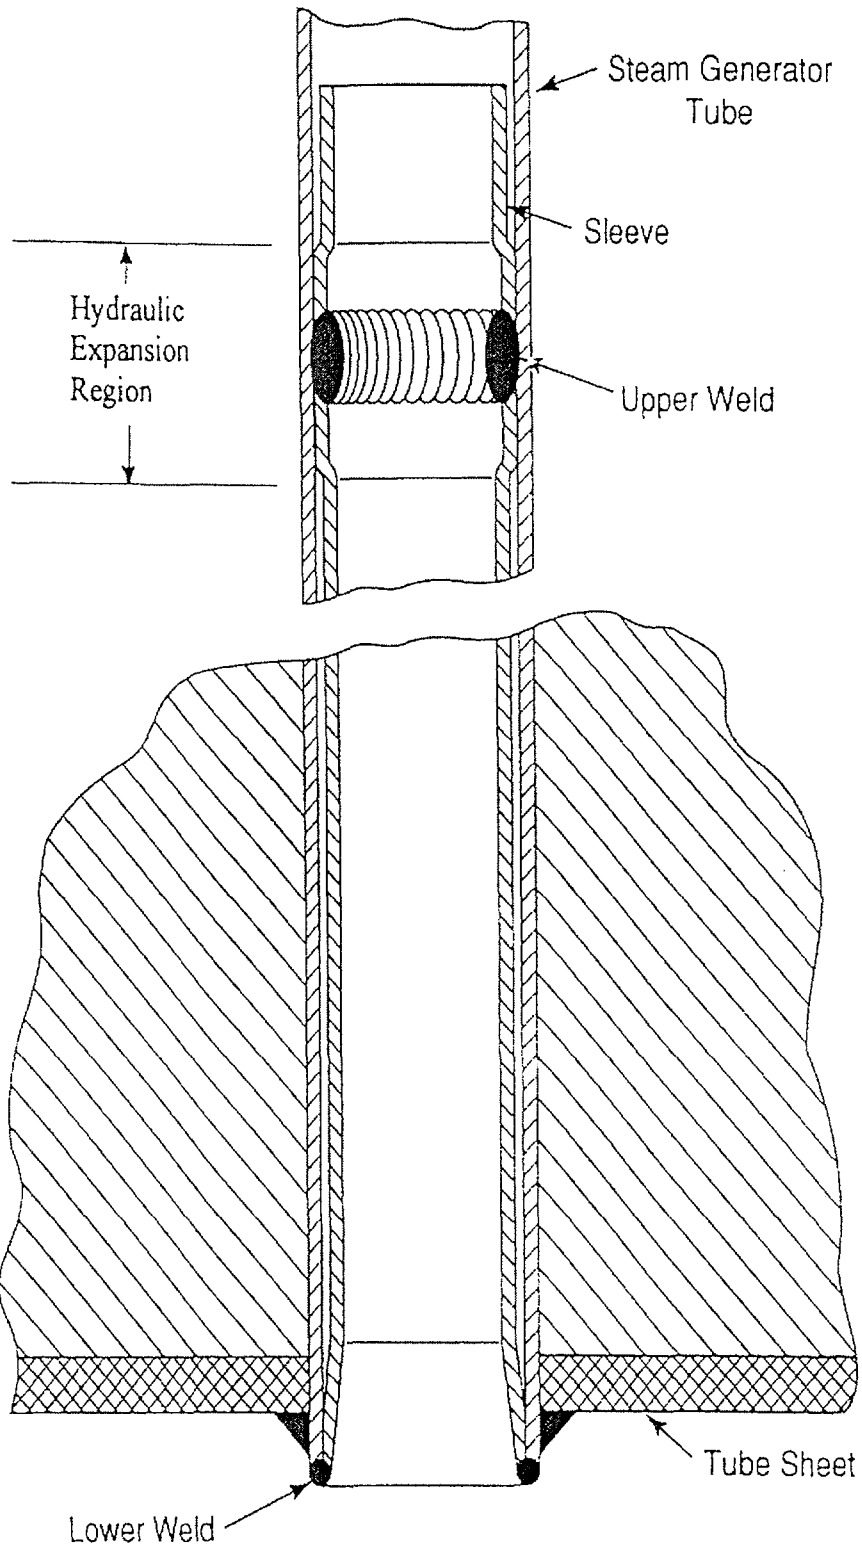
ABB CE TIG Welded Straight Tubesheet Sleeve Installation.
